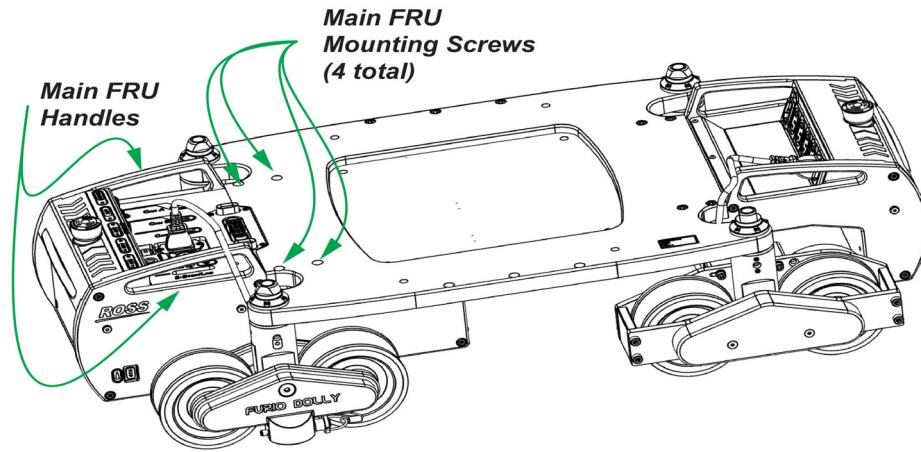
Furio SE Dolly, Showing Four Mounting Screws that Secure the Main FRU
